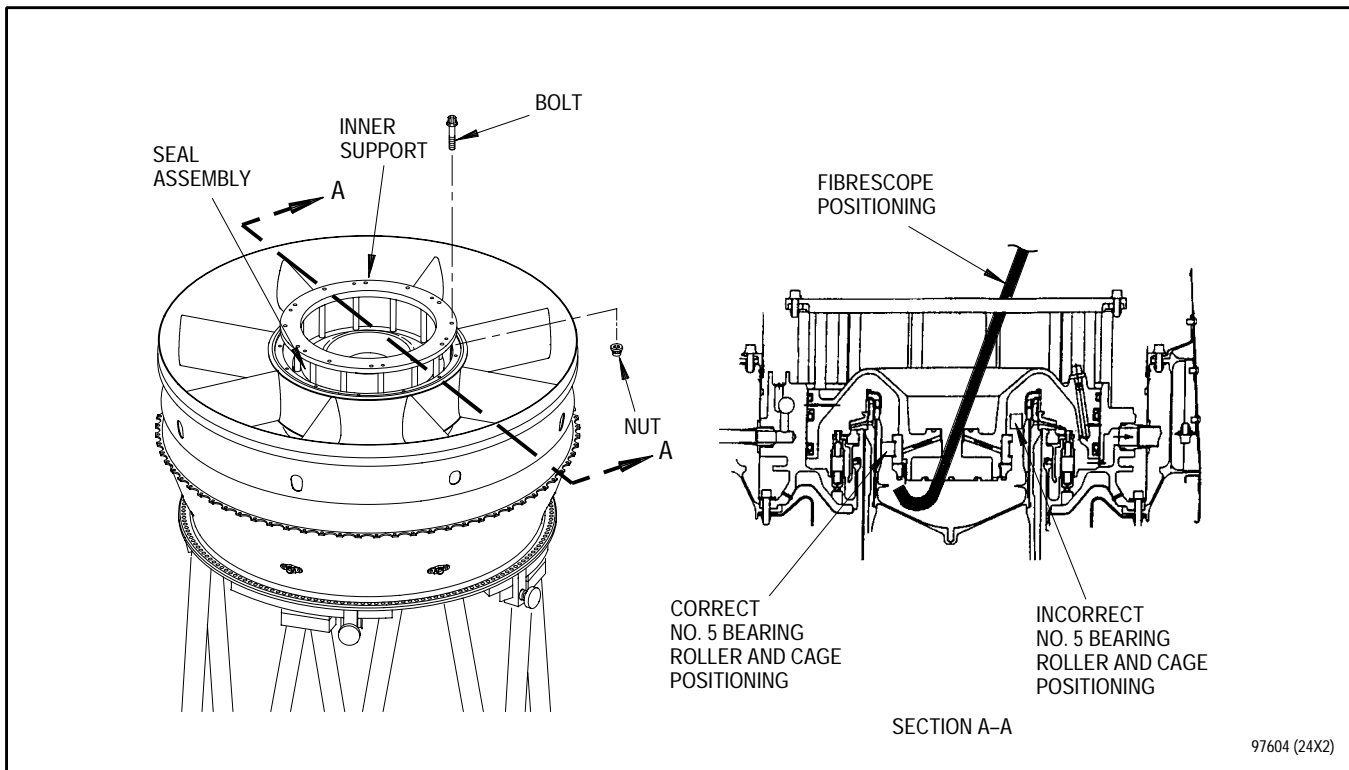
No. 5 Bearing Inner Race and Rollers - Installation (Sheet 3 of 5)
